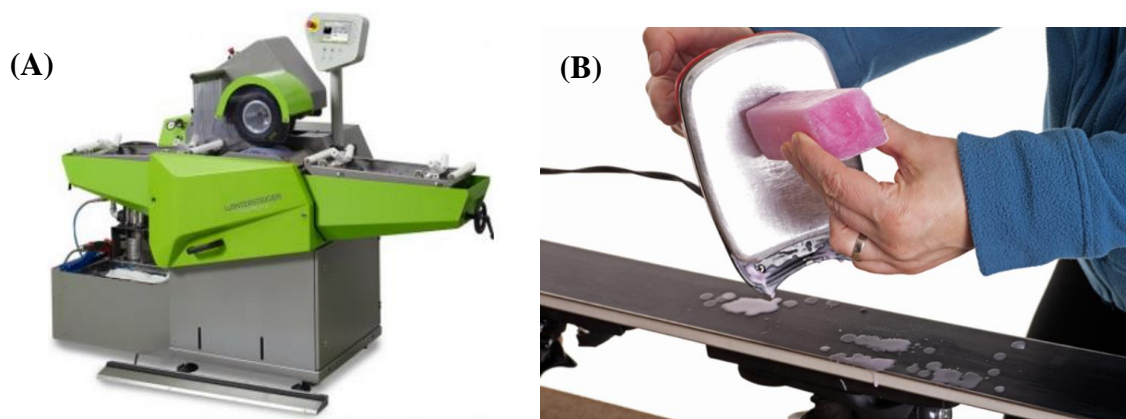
(A) Stone grinding machine [60]. (B) Hot wax applied by iron melting [61]
